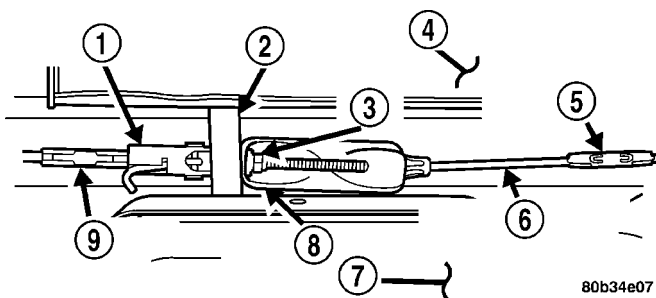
Adjustment Mark On Cable Tensioner Rod
